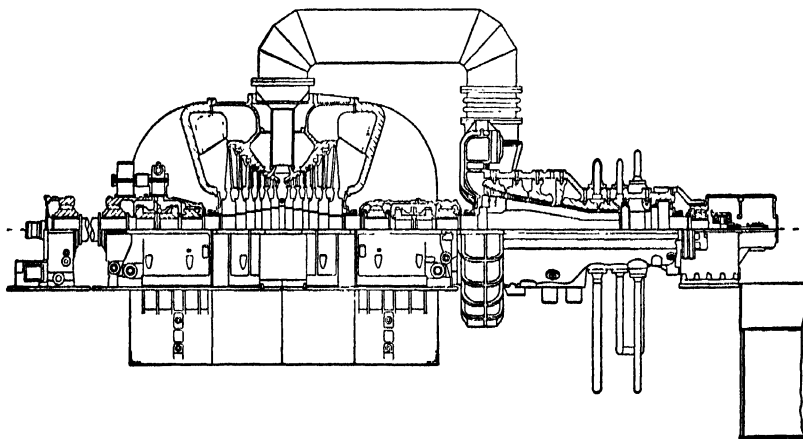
80,000 kw-1800 rpm reheat turbine. (Courtesy Allis-Chalmers Manufacturing Co.)
